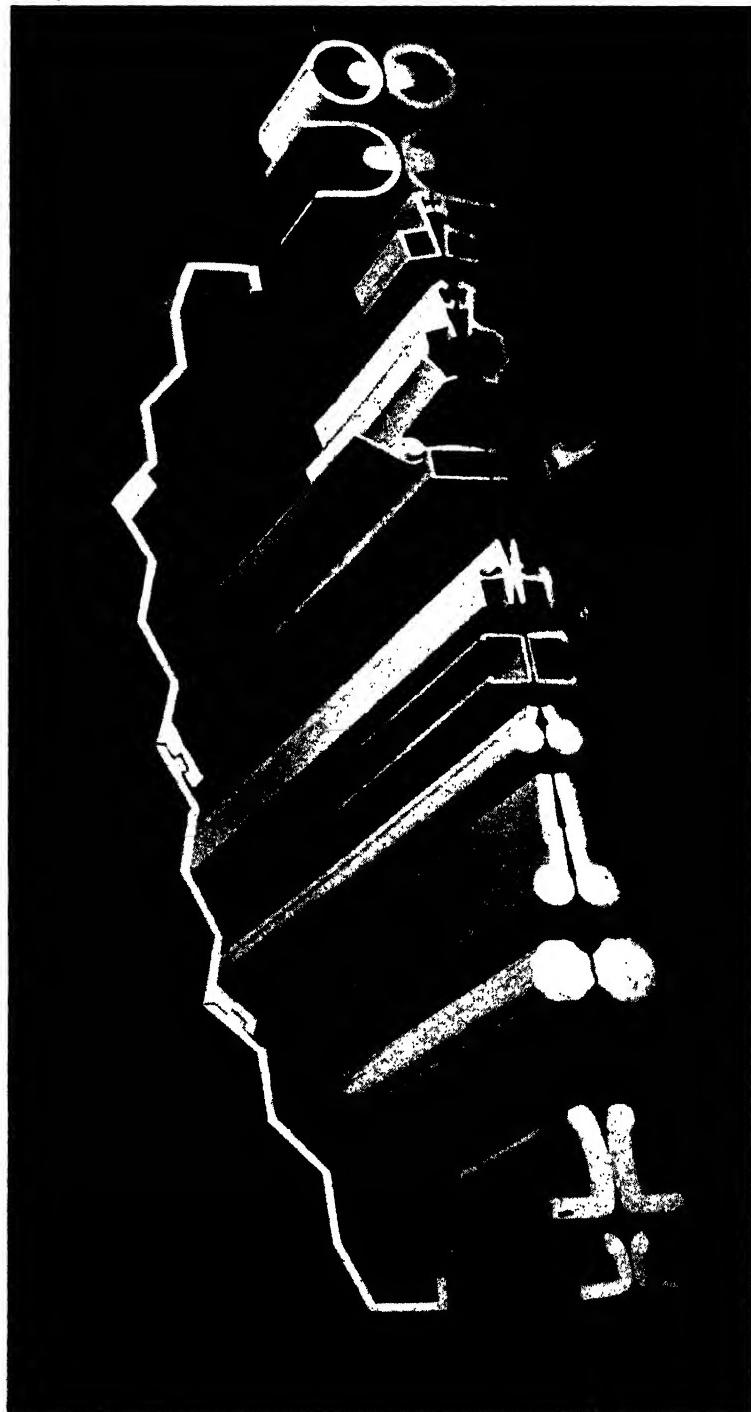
TYPICAL BRASS AND COPPER EXTRUDED SECTIONS
